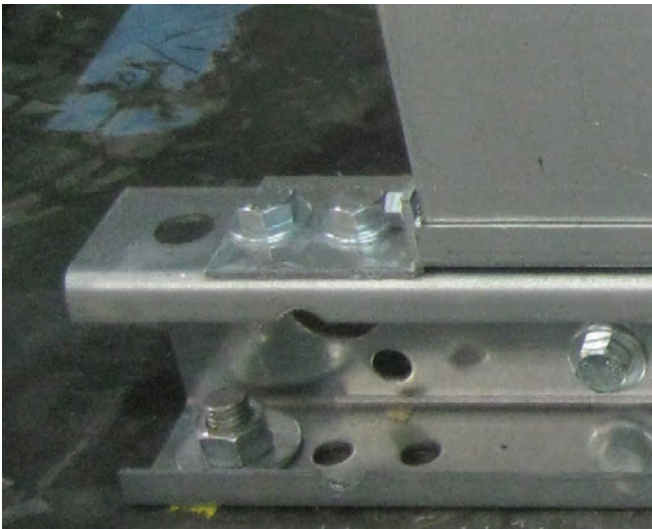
BOLT AT EACH BASE-RAIL CORNER
